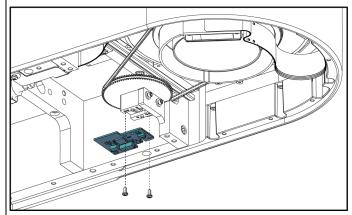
Magnetic Rotary Encoder Board Assembly inside Support Arm
